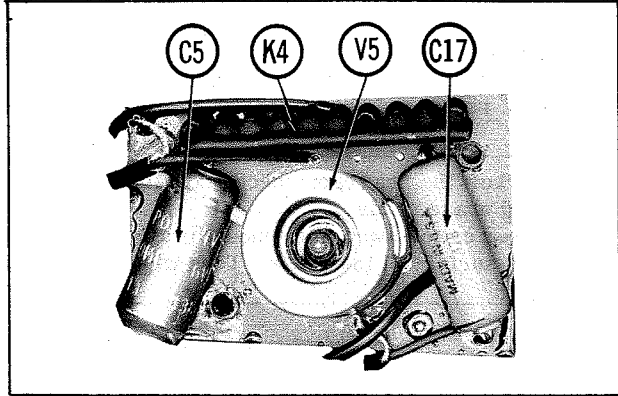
Stereo Preamplifier Printed Board, Top View.
